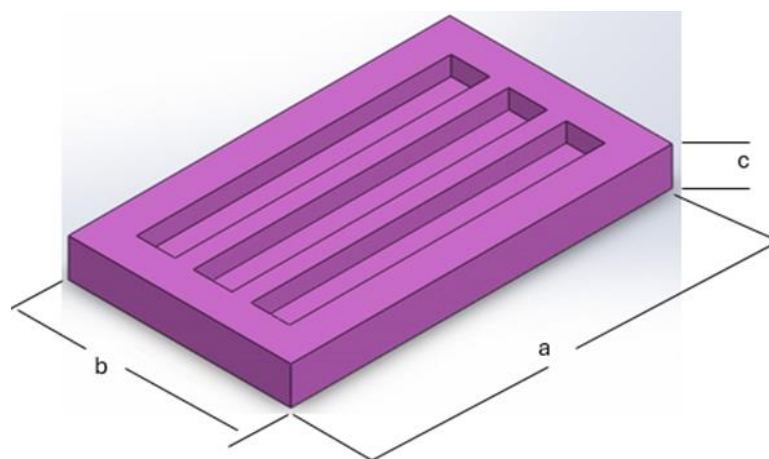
Silicon rubber mold dimensions where, a) length of mold, b) width of mold, and c) thickness of mold.
